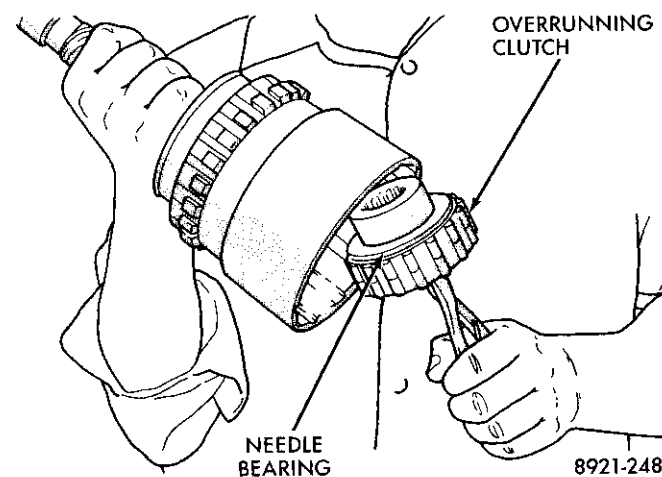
Overrunning Clutch Assembly Removal/Installation
